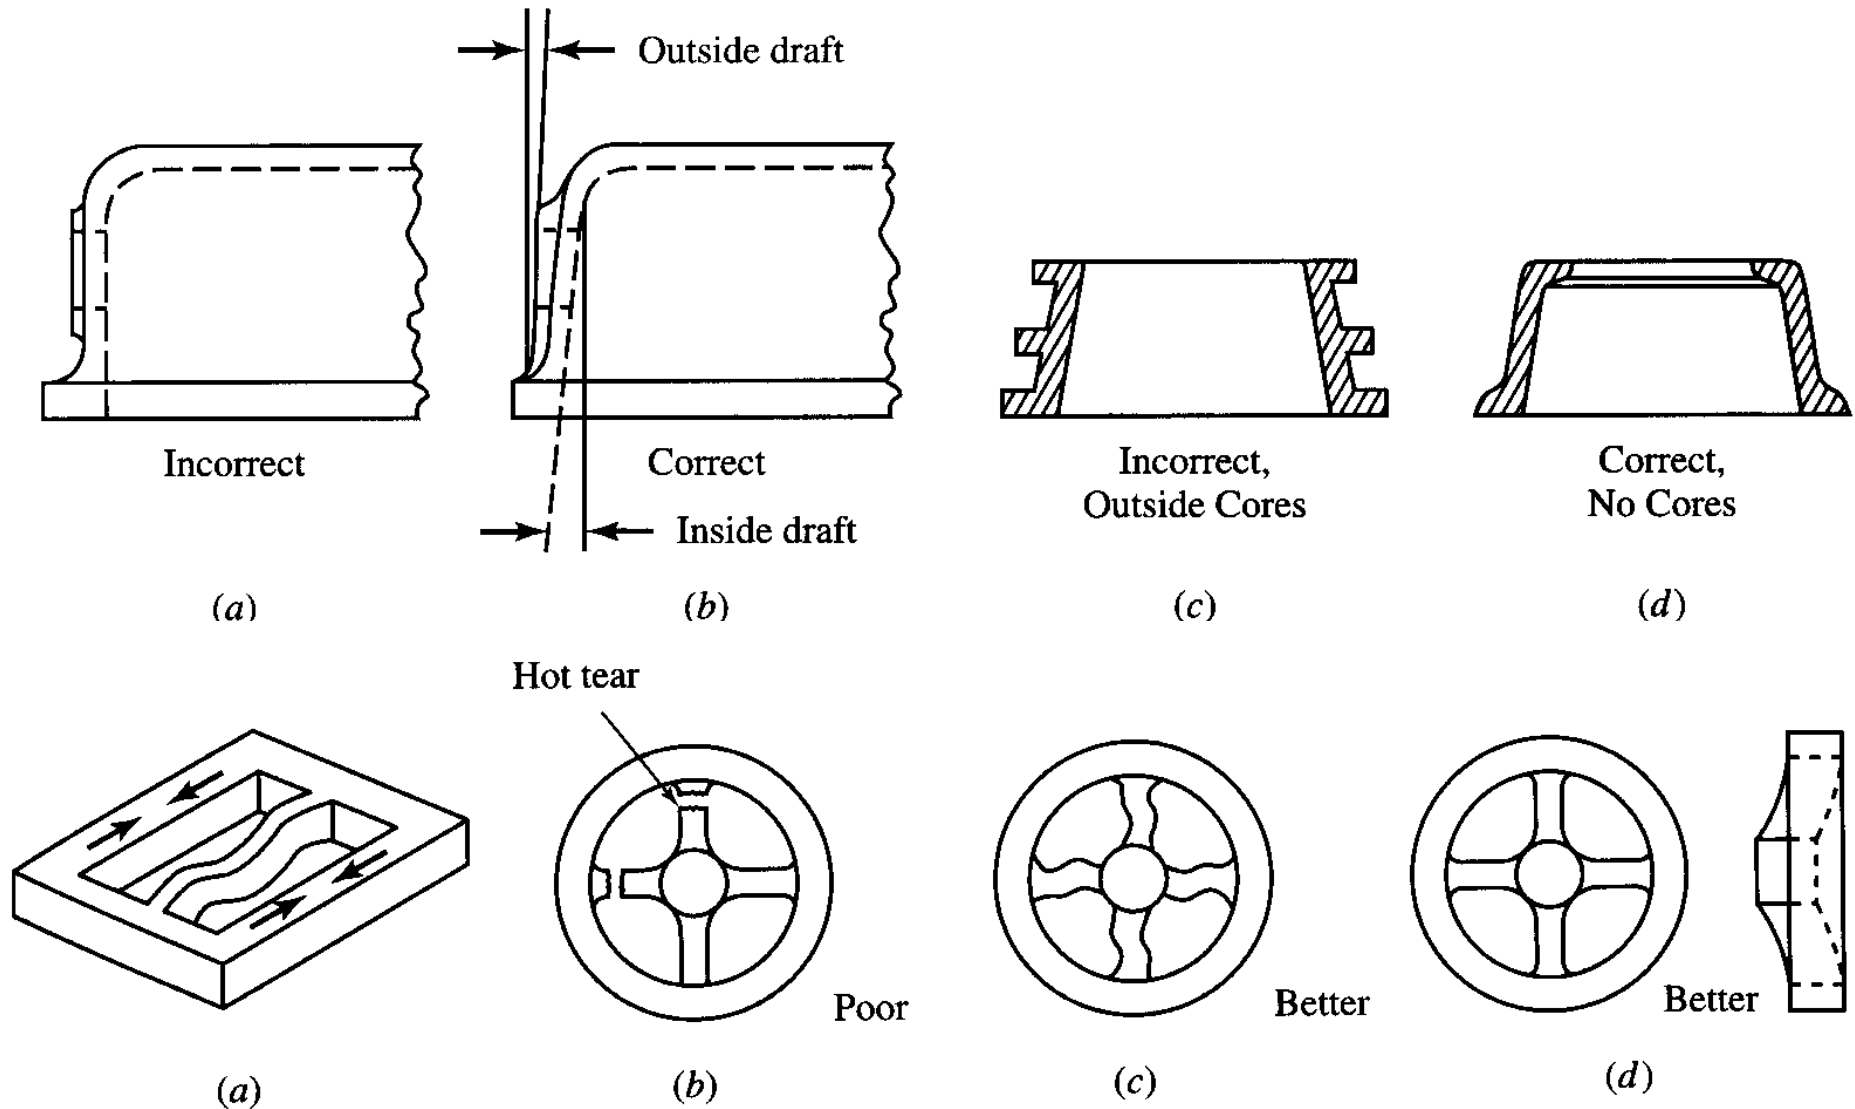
, 31, Introduction to Manufacturing Processes, by Schey, McGraw Hill
